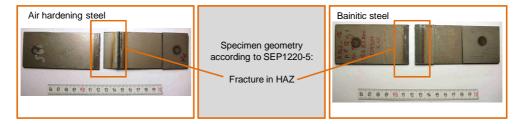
Fracture patterns of air hardening steel and bainitic steel after fatigue tests; joining technology MAG-welding
